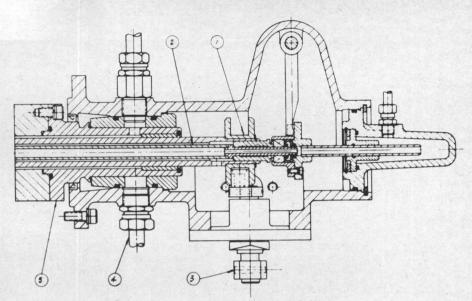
The servo control box is mounted on the reduction gear box. Shown in this view are: 1-yoke, 2-oil tube, 3-control handle, 4-drain, and 5-shaft extension.
